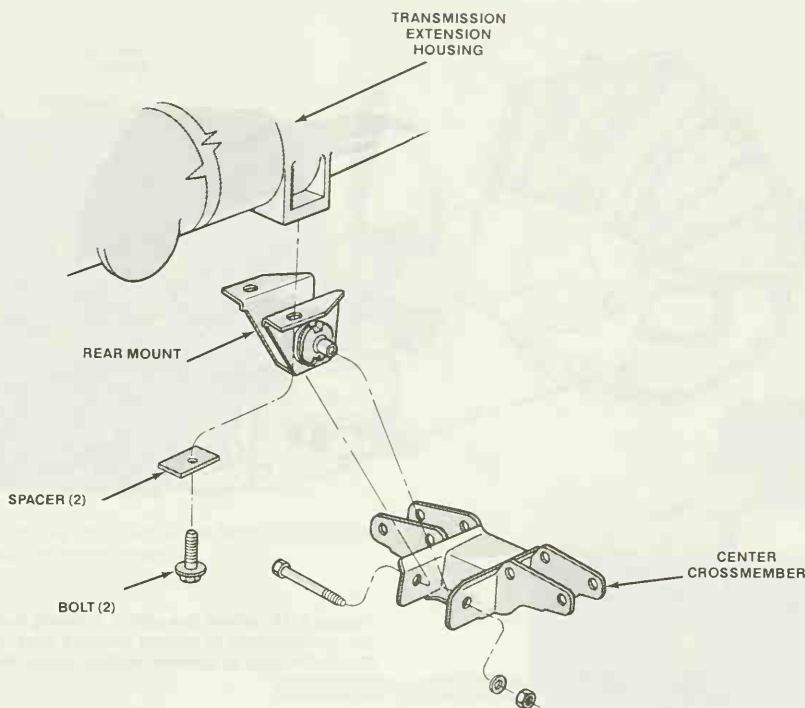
The center crossmember is removed on some vehicles to remove the transmission. (Chrysler Corporation)
